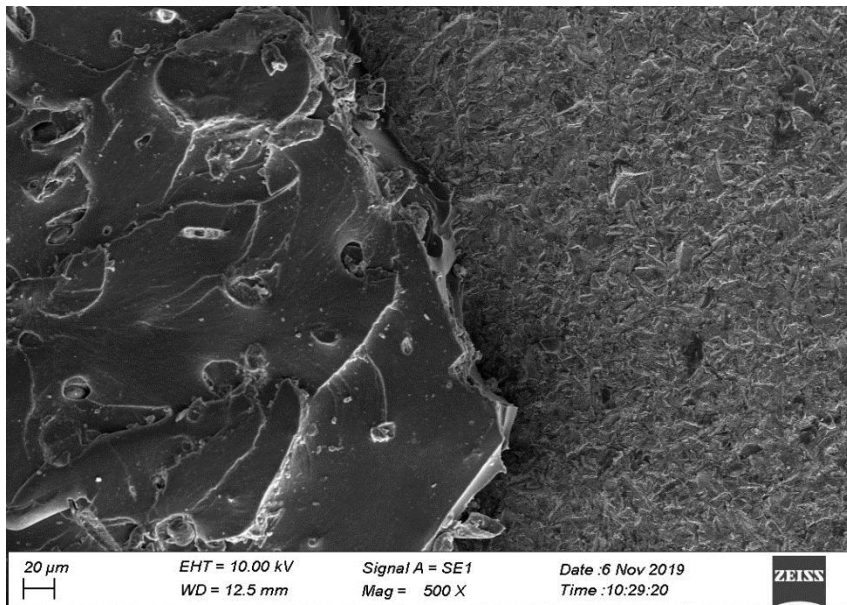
SEM fracture initiation surfaces of Trim tab (500X)
